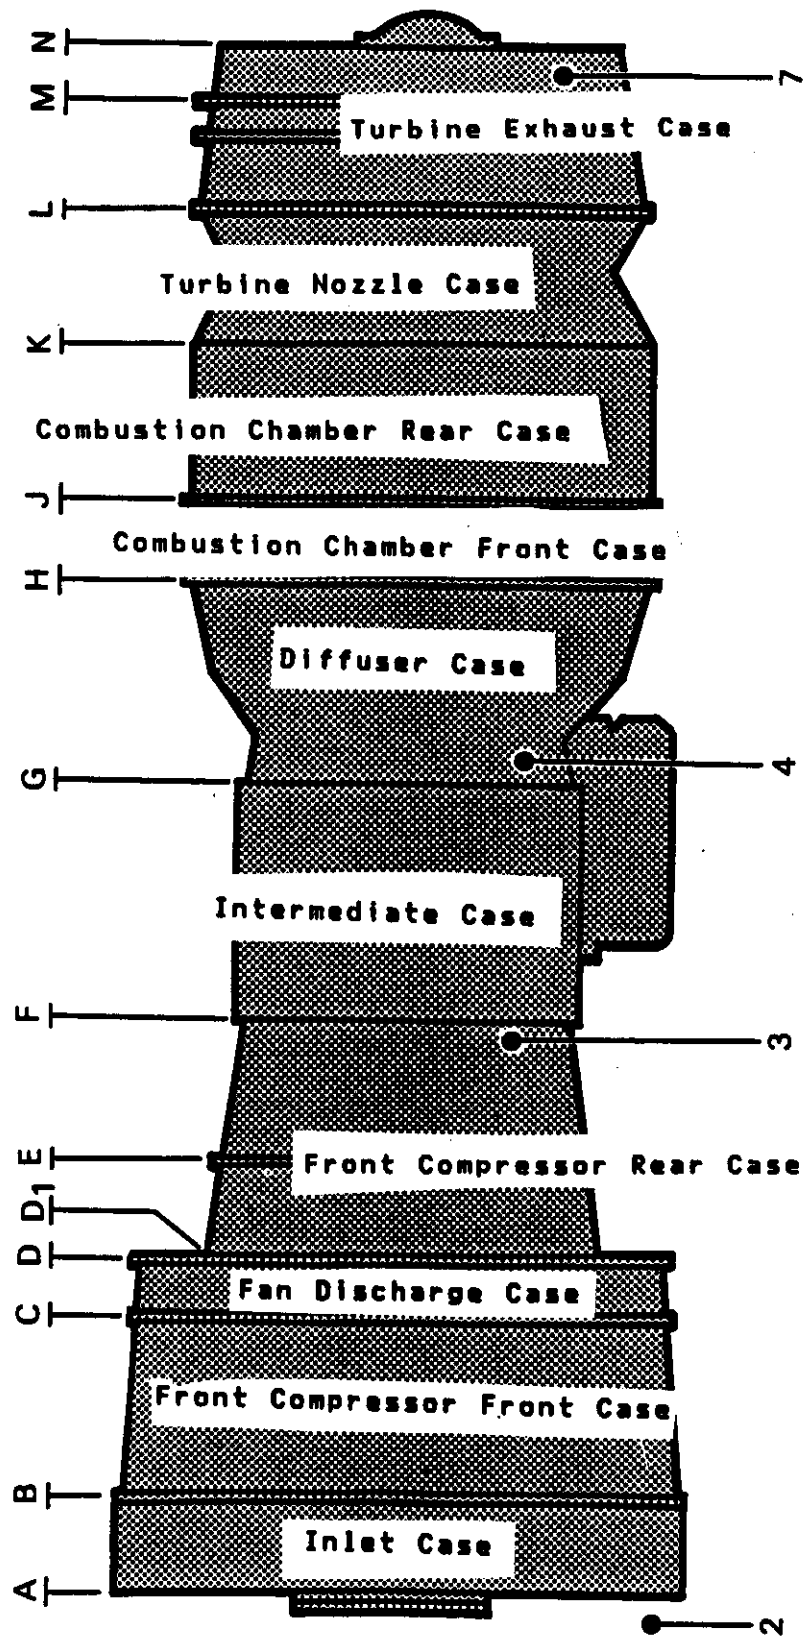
Pratt & Whitney JT3D-3B Engine Flange and Case Identification
